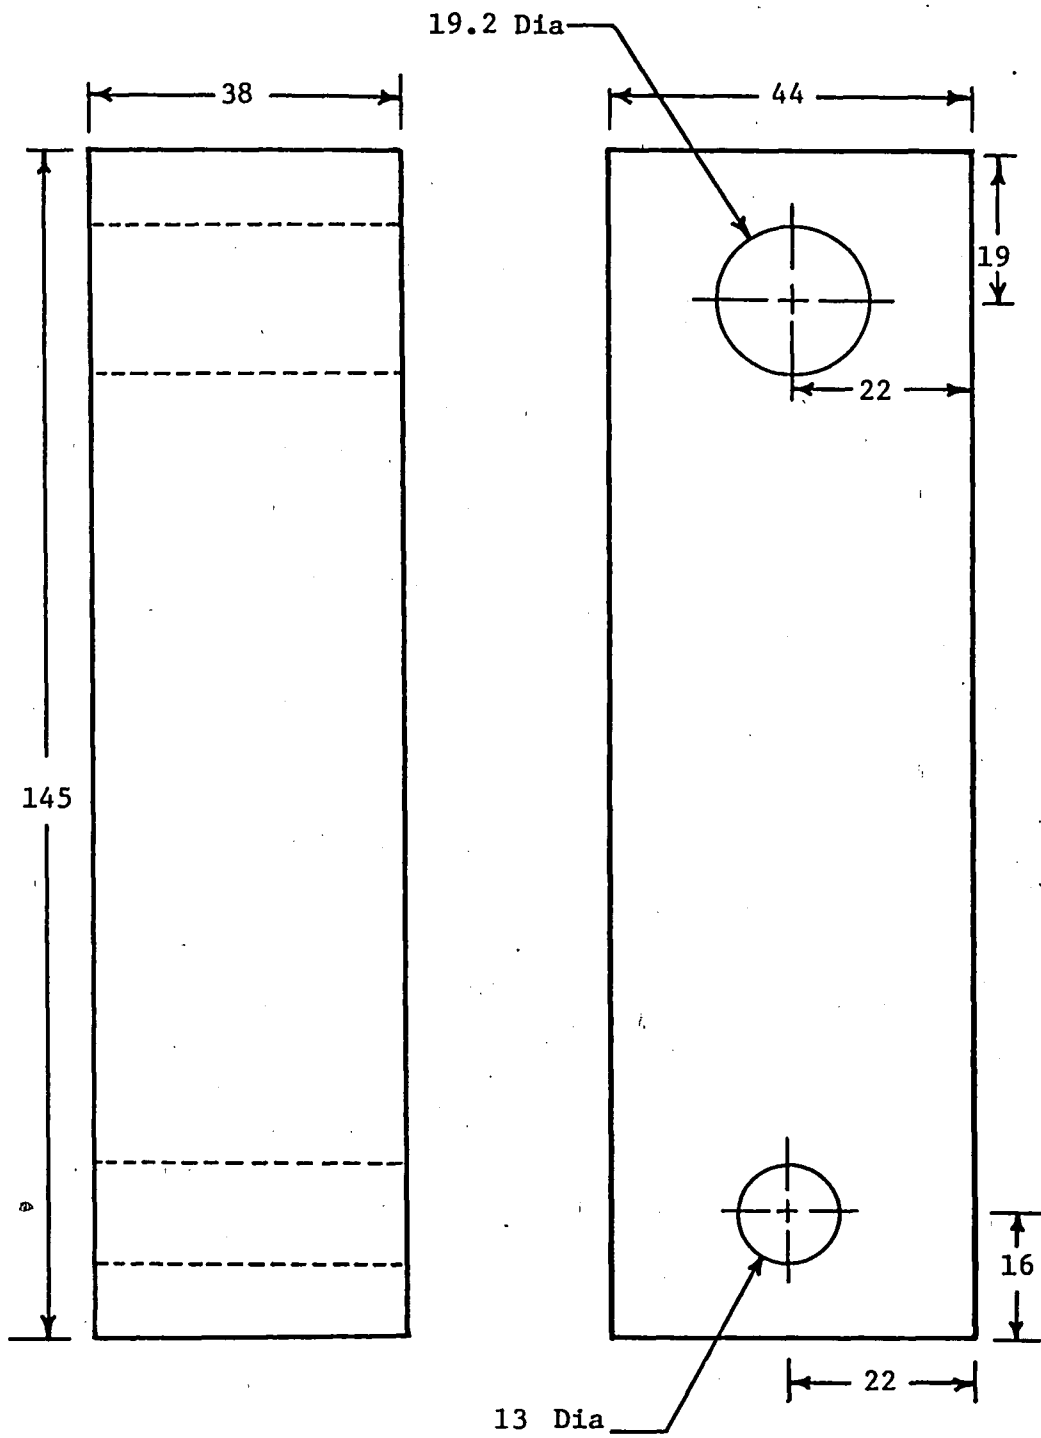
Upper Tie Rod, Specimen Mounting Assembly
